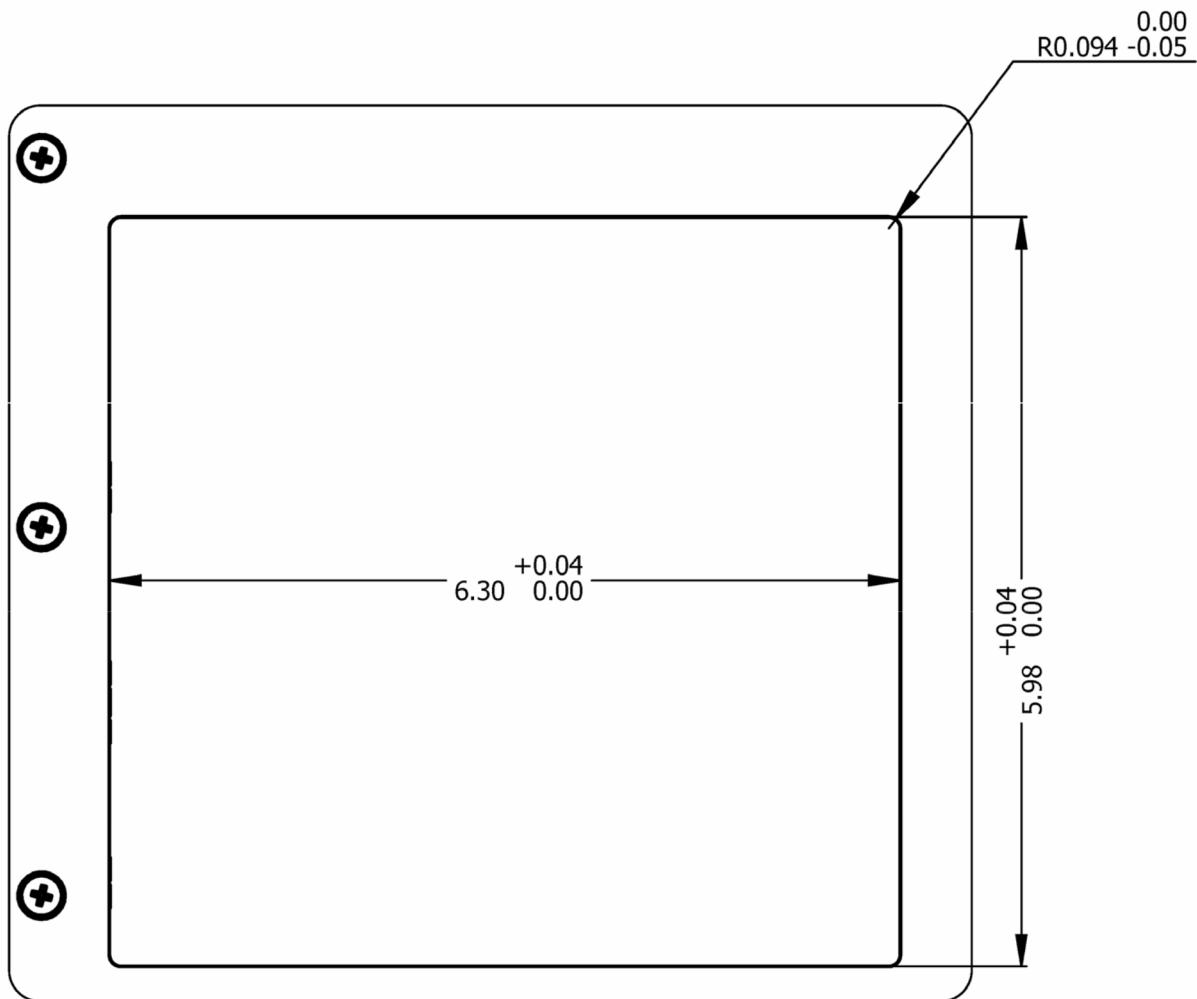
GTN 7XX Xi Panel Cutout Detail
